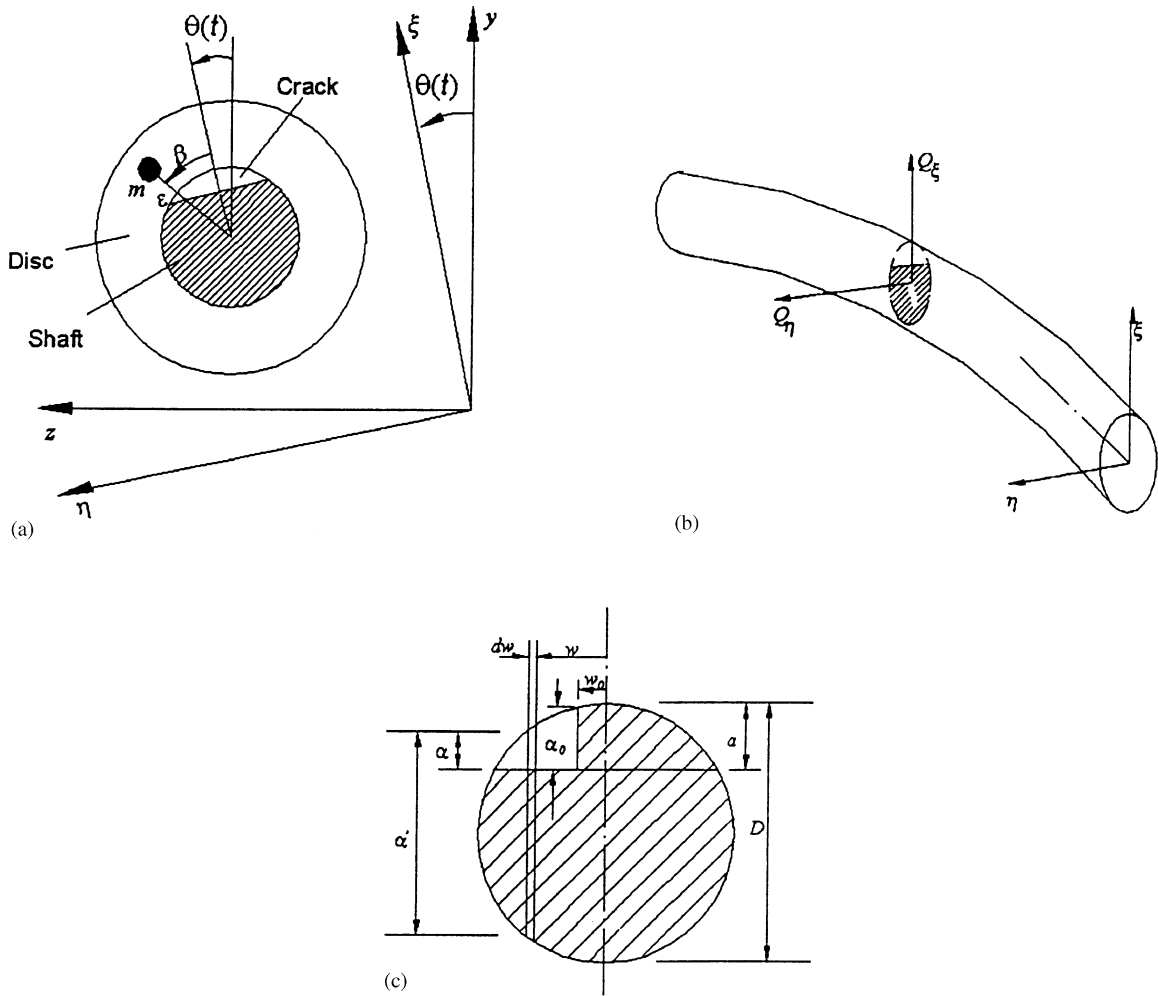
Details of the cracked rotor. (a) Co-ordinate system, (b) forces acting on the cross-section containing the crack, (c) details of the crack cross-section geometry [18].
